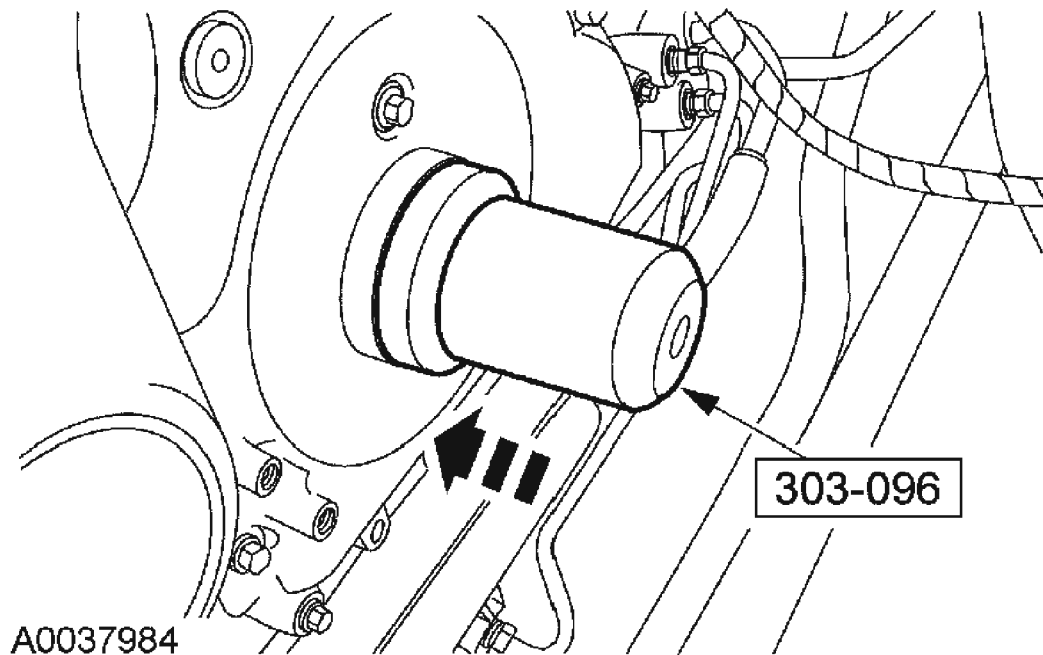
Using Special Tool To Install Crankshaft Front Oil Seal
